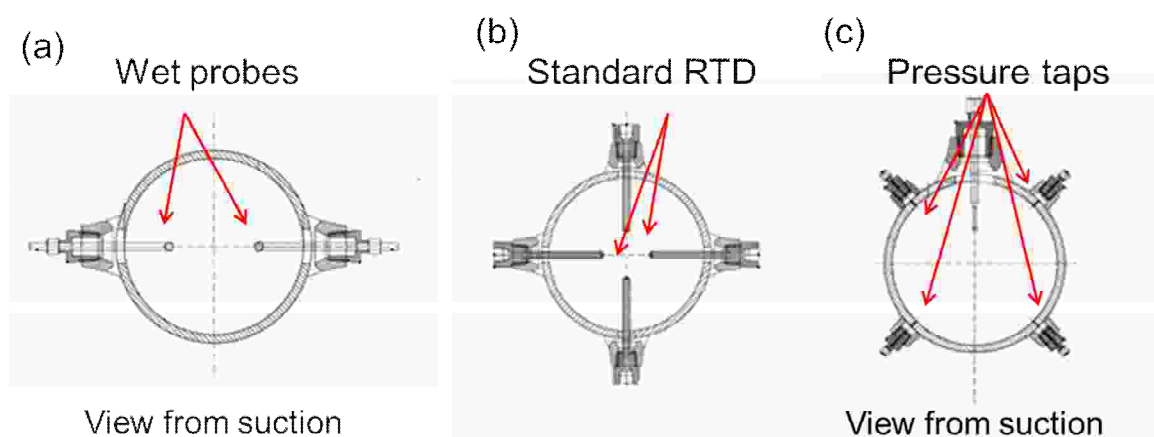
Standard and wet probes: assembly diagram. (a) meas. section AA; (b) meas. section CC; (c) meas. section BB.
